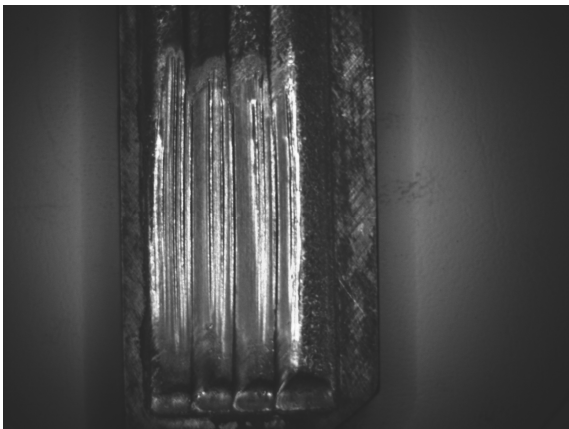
Surface layer of the test sample from the 32CrMoV12-28 tool steel after wear test alloyed NbC, (power range 1.6 kW), magnification 10x
